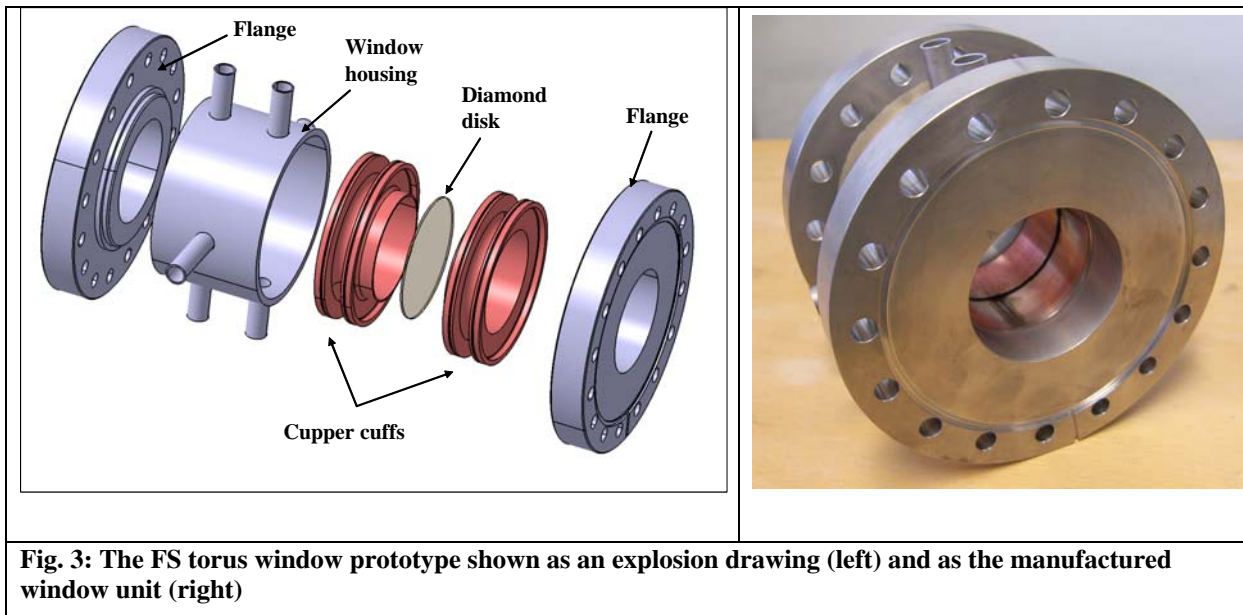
The FS torus window prototype shown as an explosion drawing (left) and as the manufactured window unit (right)
